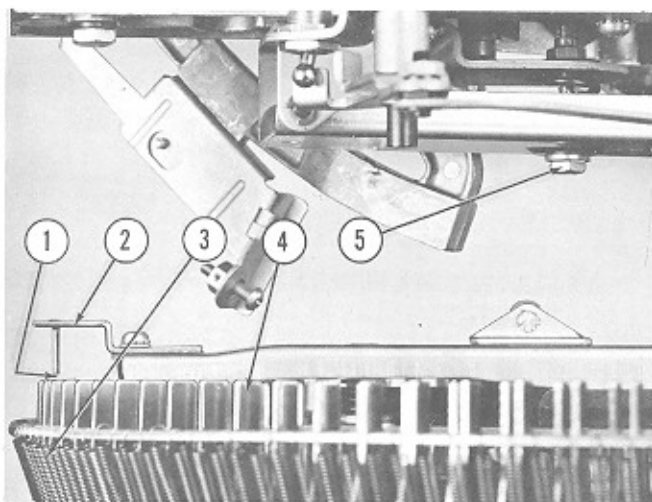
SELECTOR CRANK ARM CLEARANCE ADJUSTMENT
